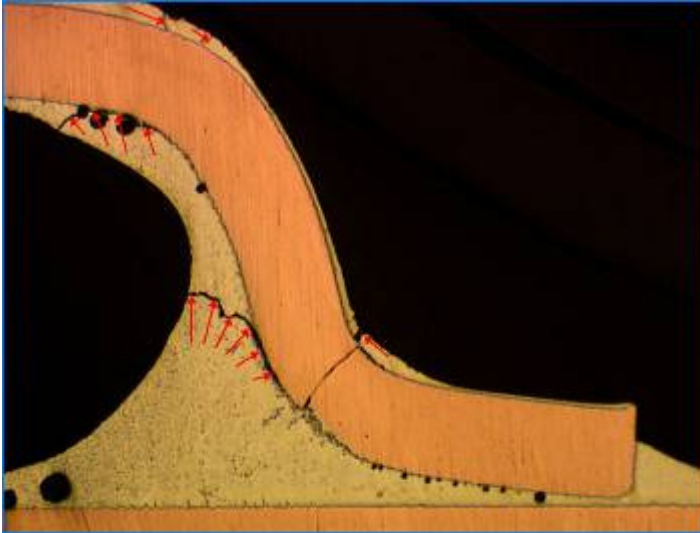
cross section, SN63, U20, right lead and solder crack and voids, 100x
